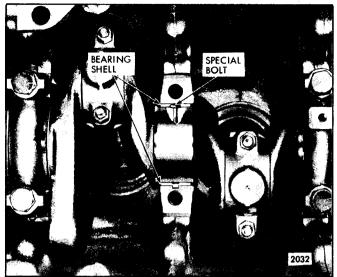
Removing Upper Main Bearing Shell (Except Rear Main)
